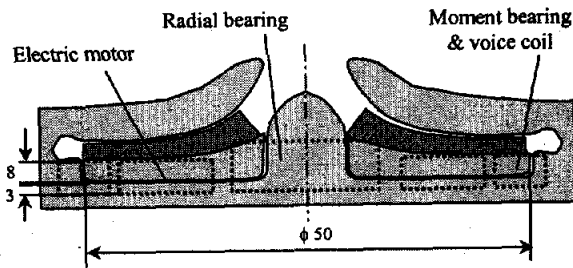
Schematic cross sectional view of the HeartQuest™ VAD showing the magnetic bearing configuration
